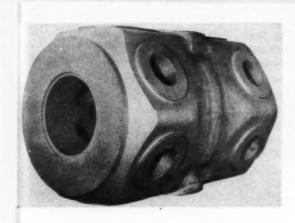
Pump housing consists of two premachined cast sections joined by a welded band. Casting, cleaning and inspection are simplified
